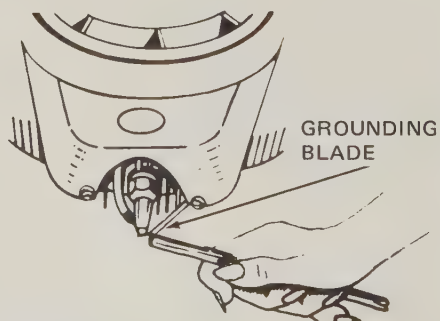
Grounding blade near the spark plug used to stop the engine.
